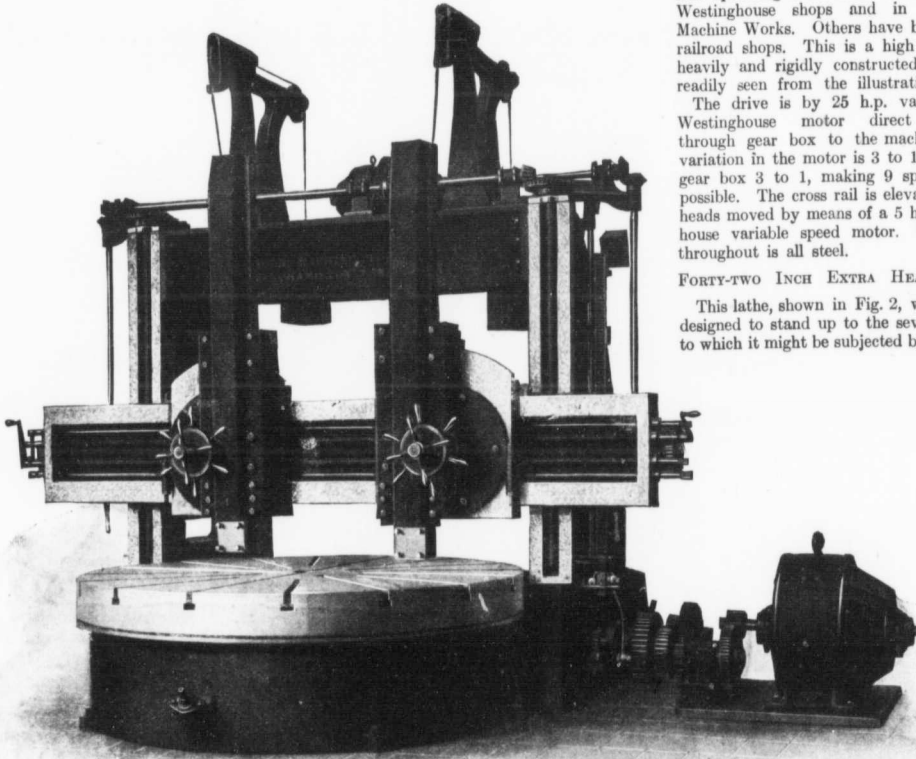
Eight Foot London Machine Tool Boring Mill.
